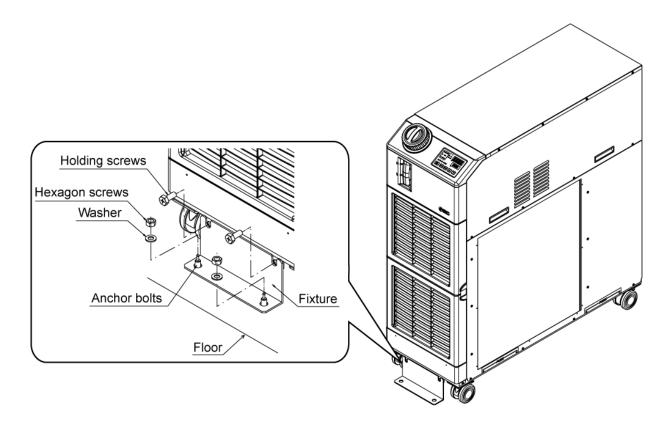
Settlement to the floor (This drawing is [HRS090-A-20].)
